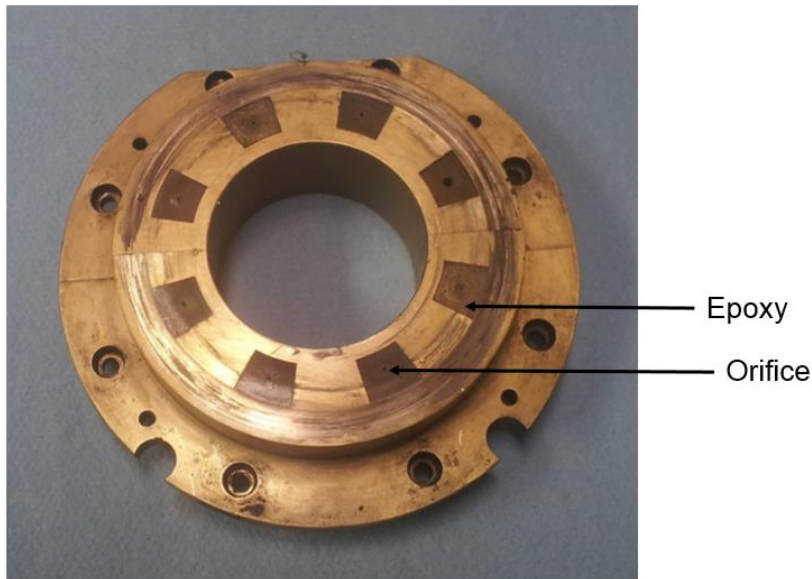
Photograph of damaged slave thrust bearing [10].
